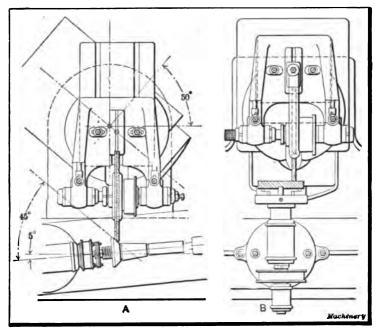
(A) Grinding a Double Taper by Traversing both Platen and Wheel Slide. (B) Grinding the Side of a Disk
